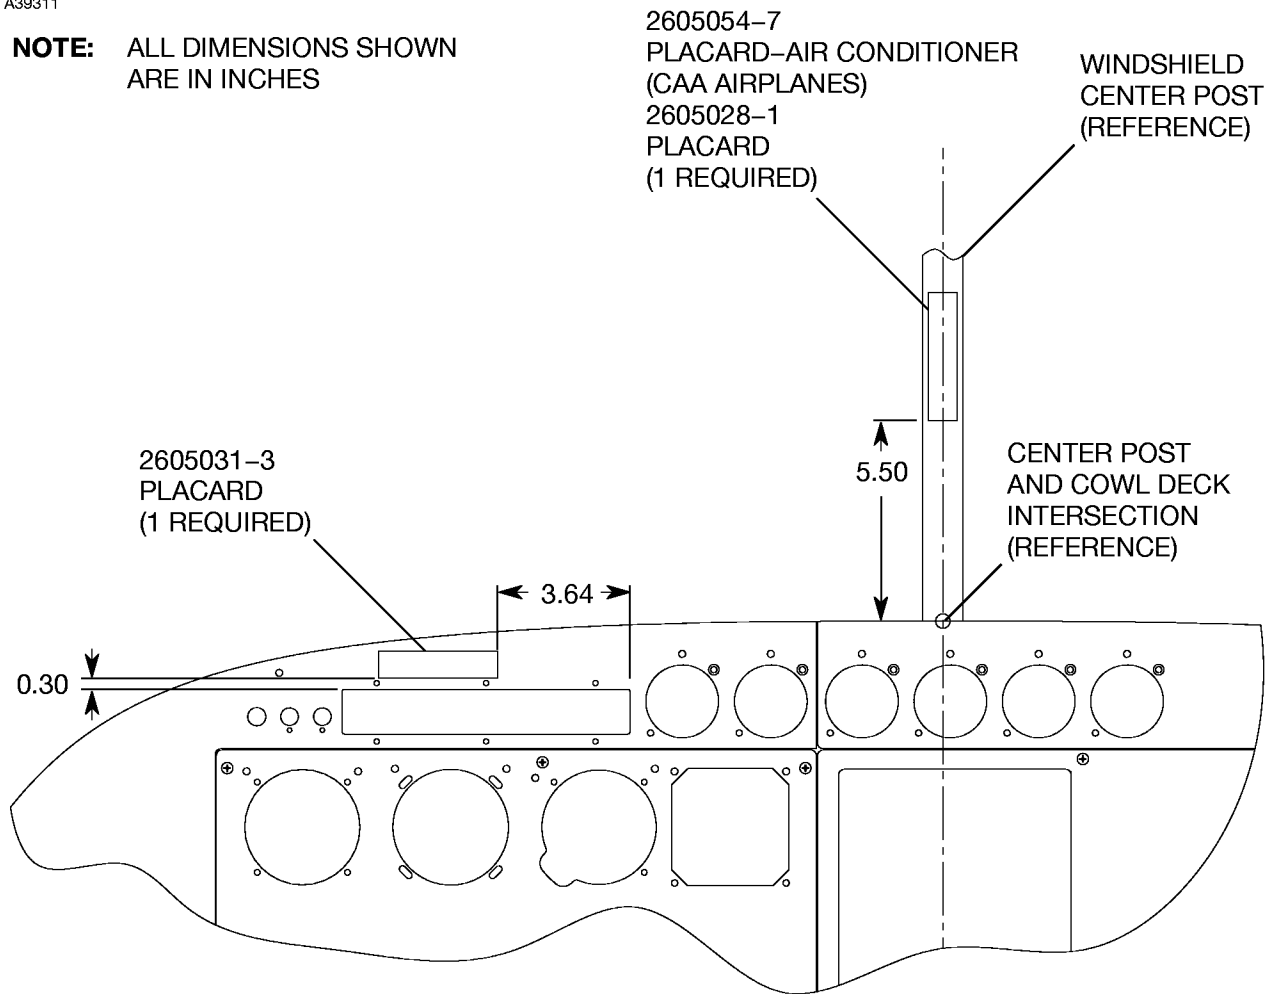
Instrument Panel Switch and Placard Installation (Sheet 2)
